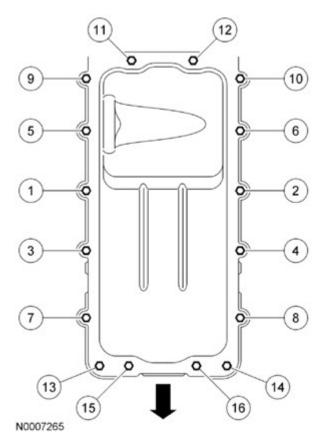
Locating Oil Pan Gasket And Oil Pan Courtesy of FORD MOTOR CO.
